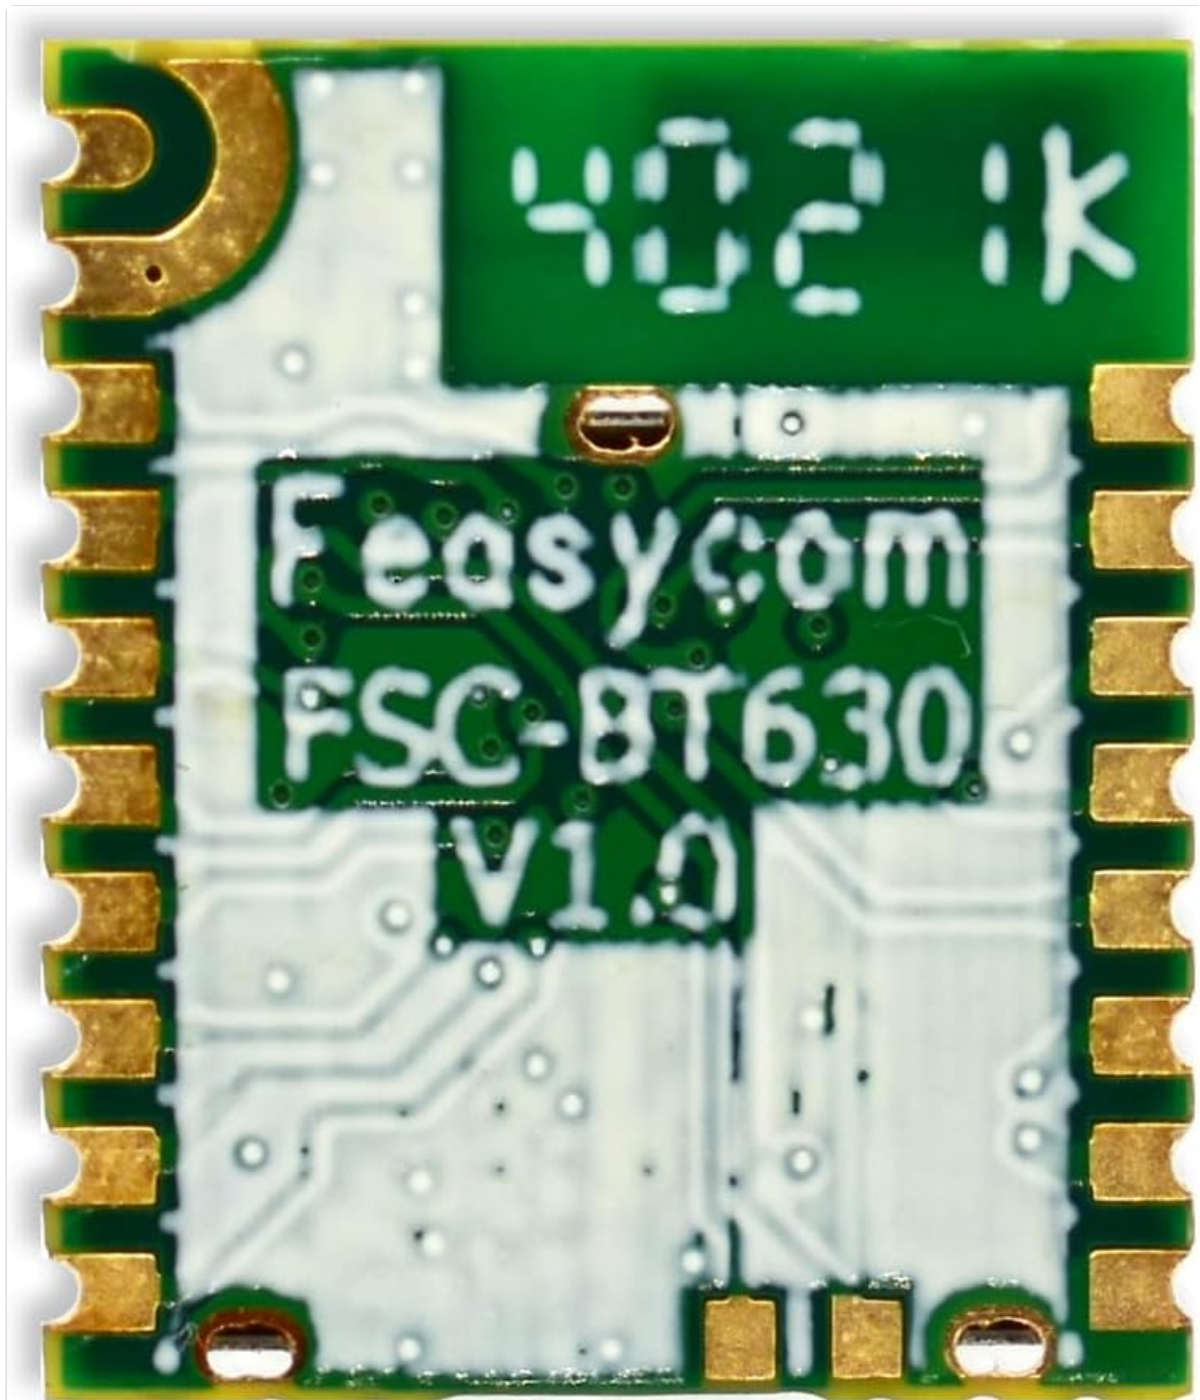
Back view of the FSC-BT630 module, illustrating the solder pads for integration.
